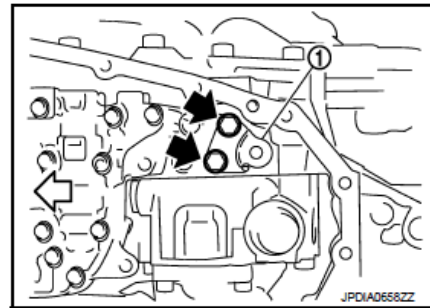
Identifying Oil Strainer Assembly Mounting Bolts
